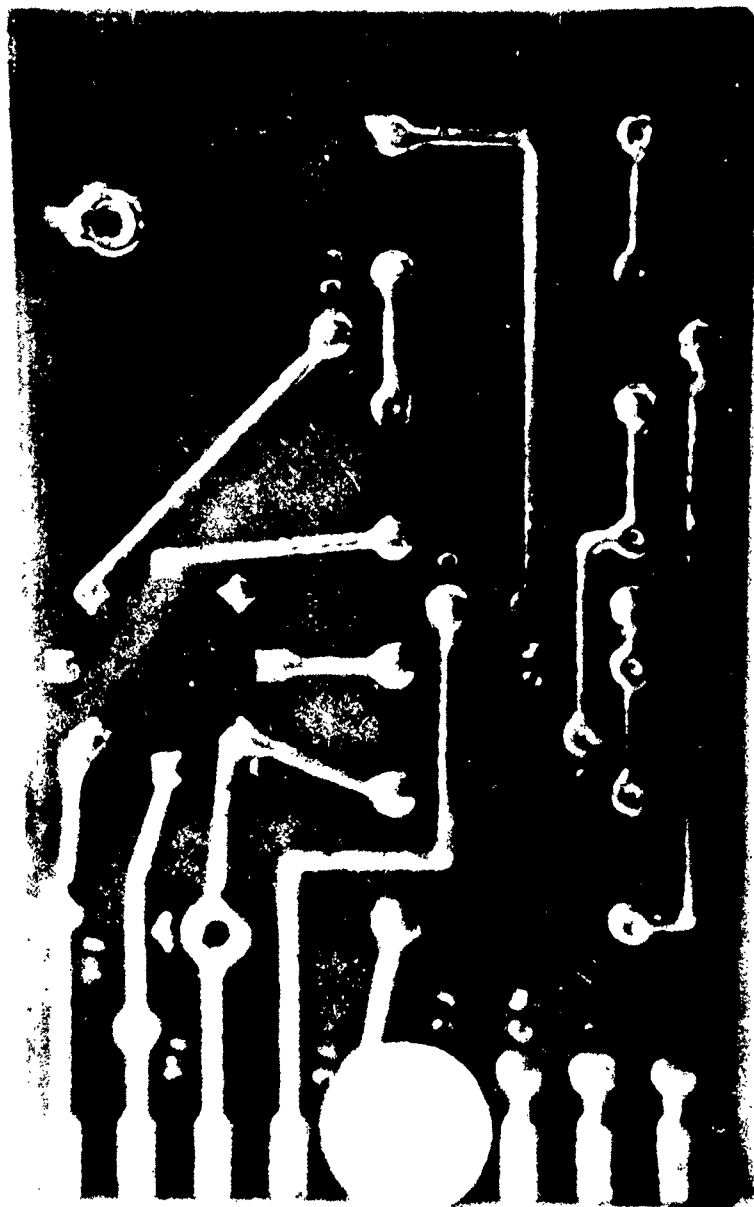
Board No. 30 from Blister Test No. 5 After Soldering.
